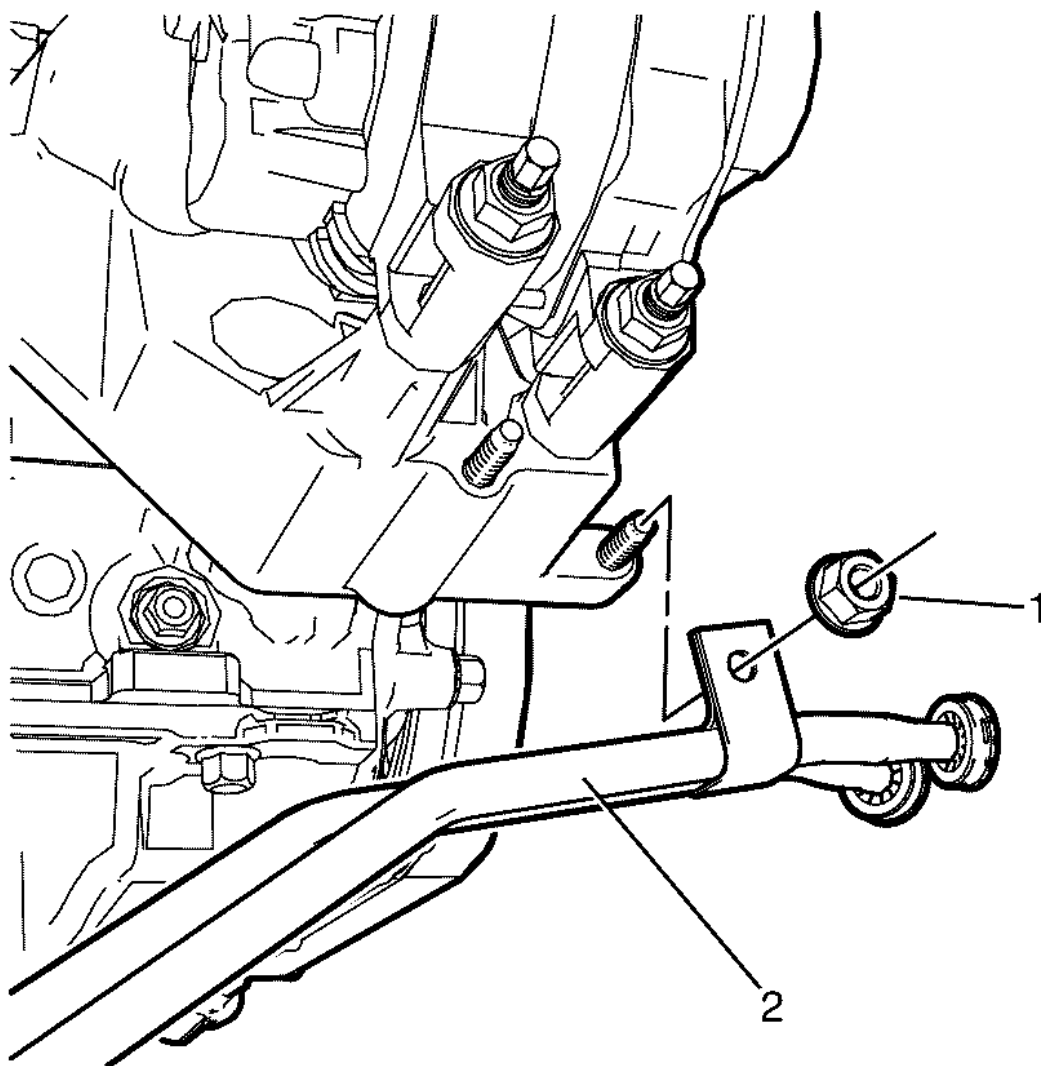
Identifying A/T Cooler Pipe Clamp To A/C Bracket Nut
